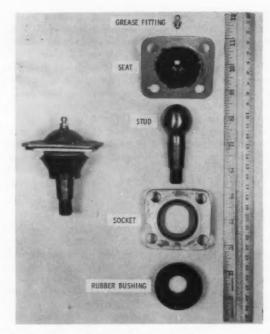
Shows two 1956 Chevrolet ball joints as used in test machine, the left assembled, the right dismantled.
